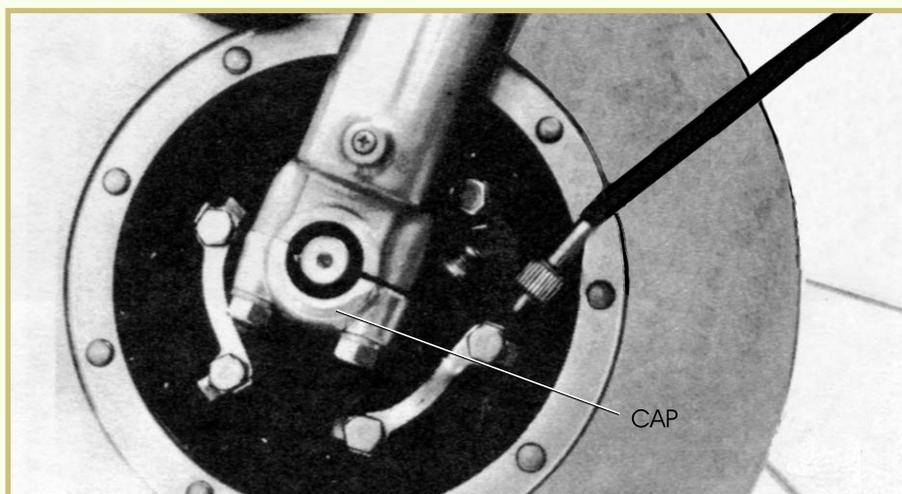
The front axle slides out of the fork after the axle nut has been removed.
